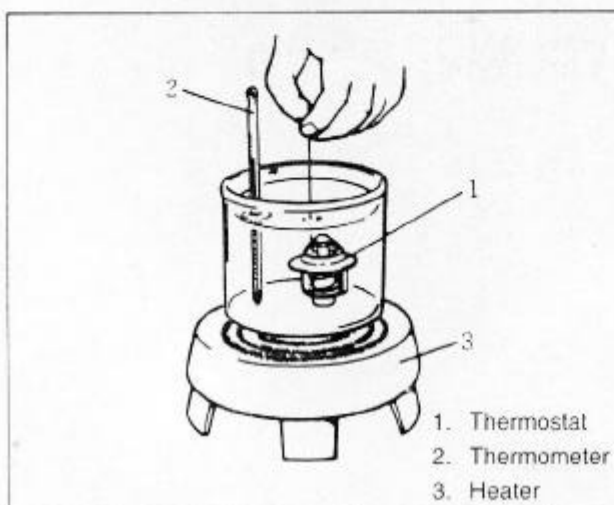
B — 14 INSPECTION OF THERMOSTAT VALVE OPERATION
